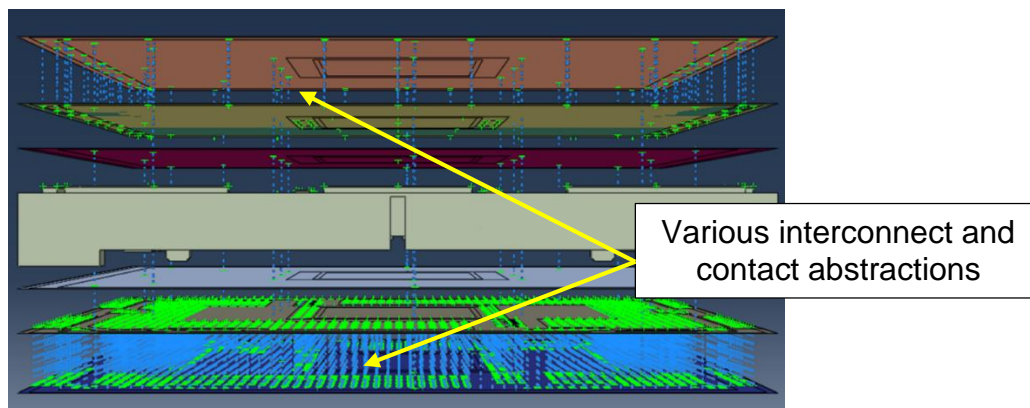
Exploded Socket Body and Joint Integration (large complex patterns of solder joints and bolts)
